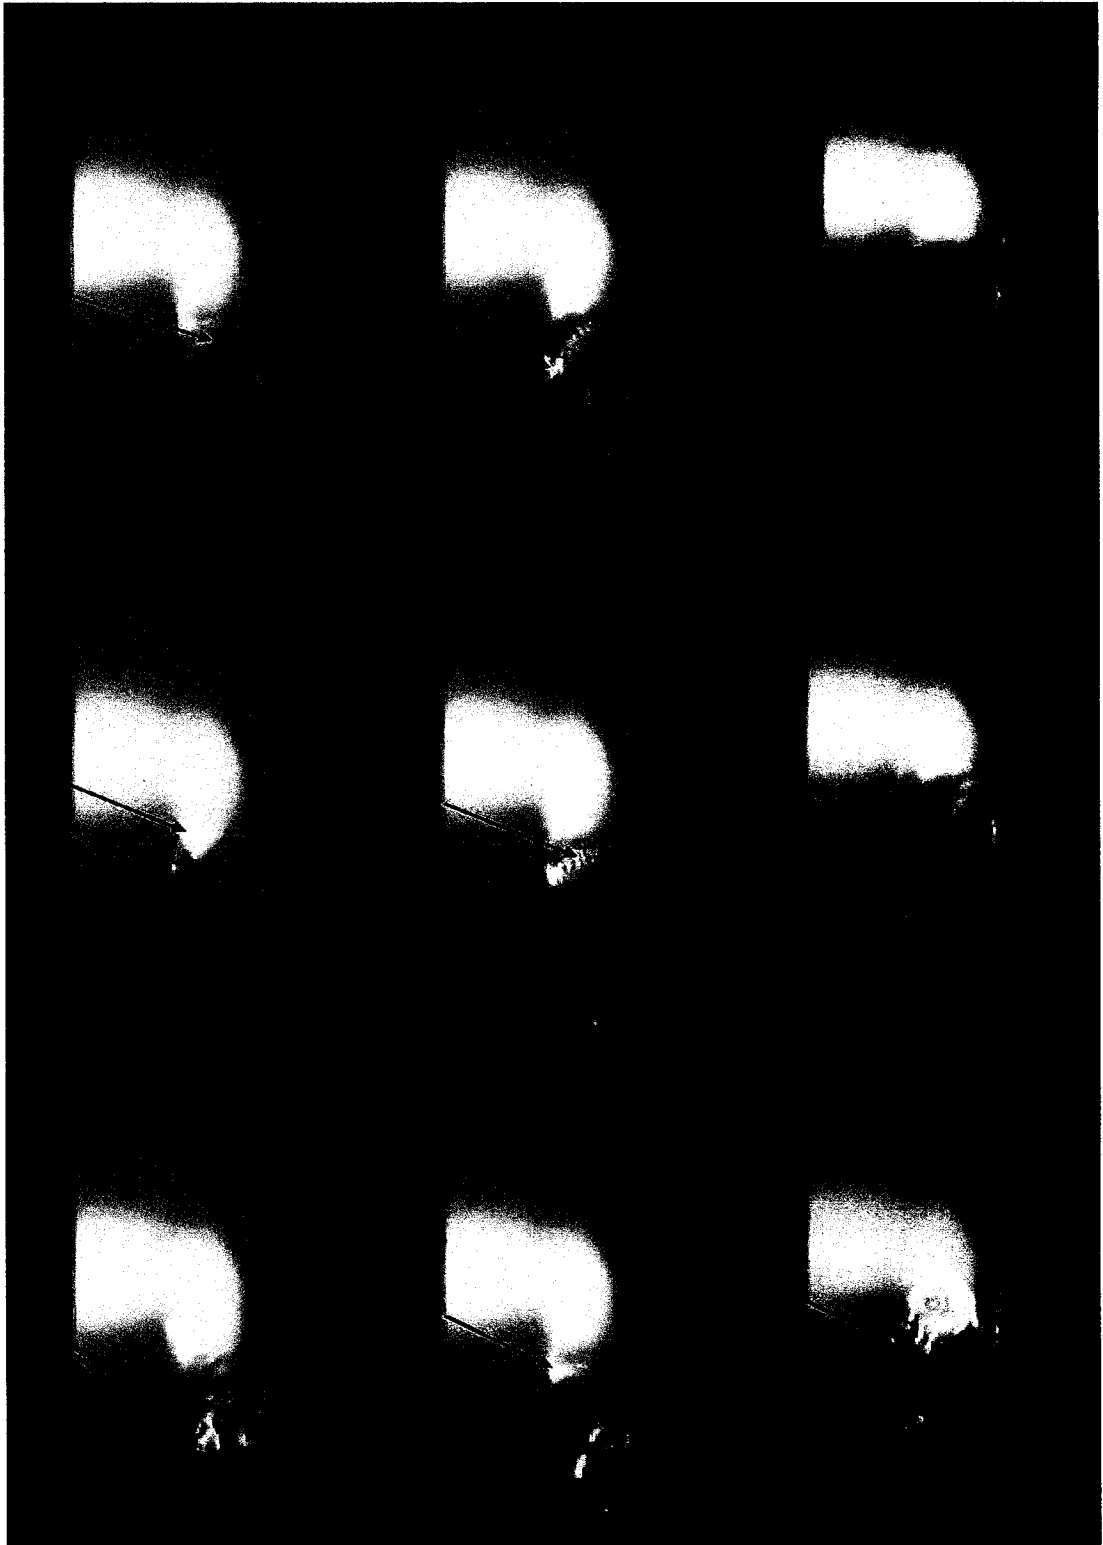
Video Captures of Weld Bead Humping Mechanism (approx. 1.5 seconds)
